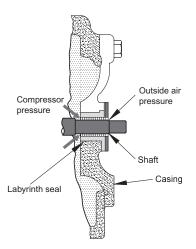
Cutaway illustrating a labyrinth seal used to reduce gas leakage between shaft and casing.
